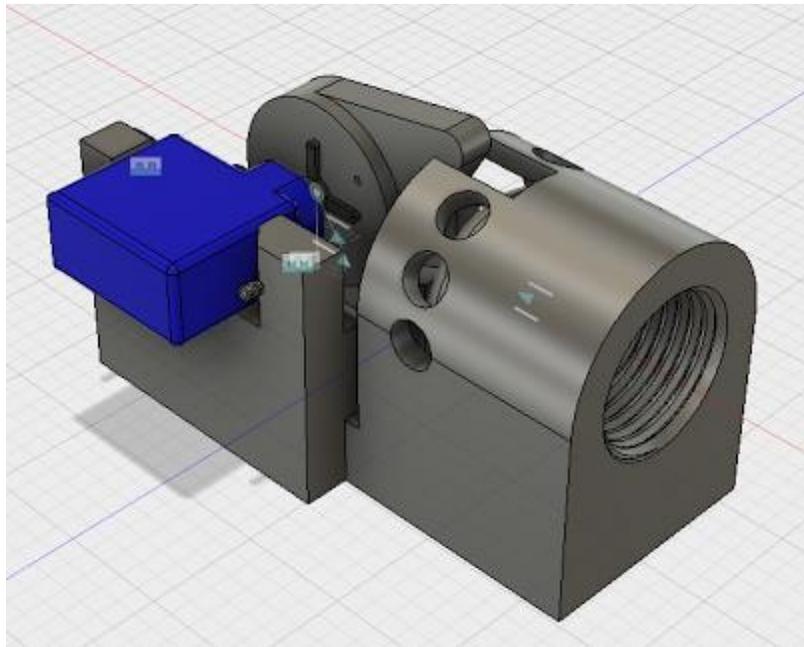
Three Coaxial Piston Valves with One Exhaust Line.
